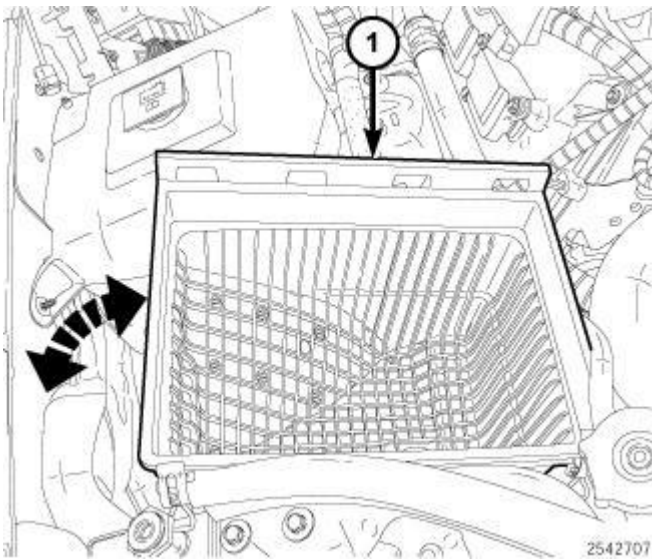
Lifting Housing Assembly While Rotating Up Toward Engine
